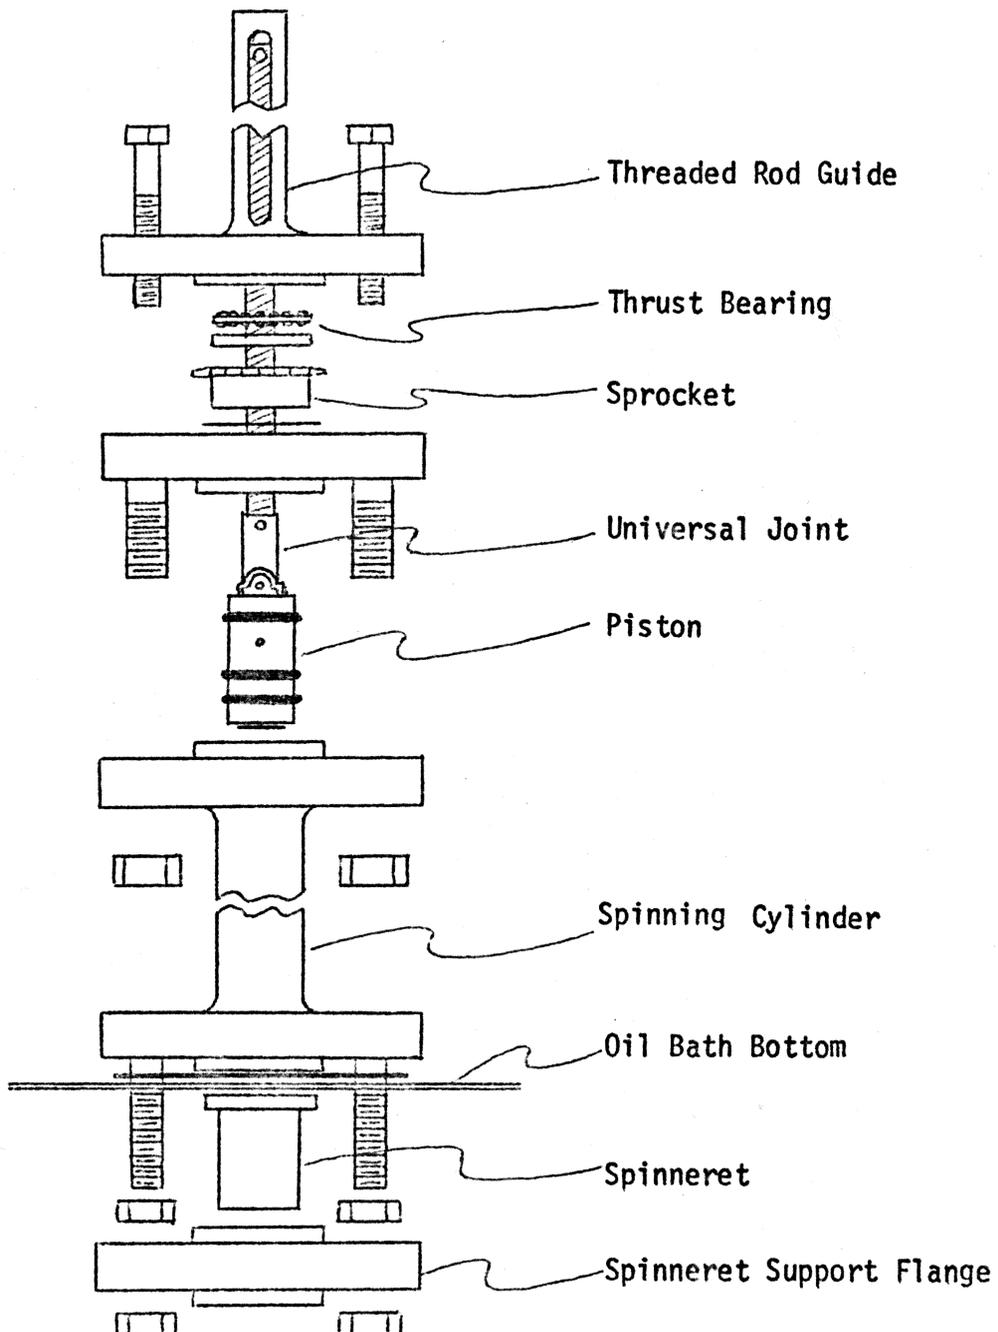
Assembly View of Piston Assembly, Spinning Cylinder, and Spinneret Assembly
